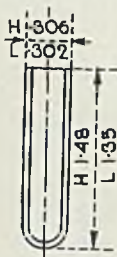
A — Third draw, done using tool shown in Fig. 5B
